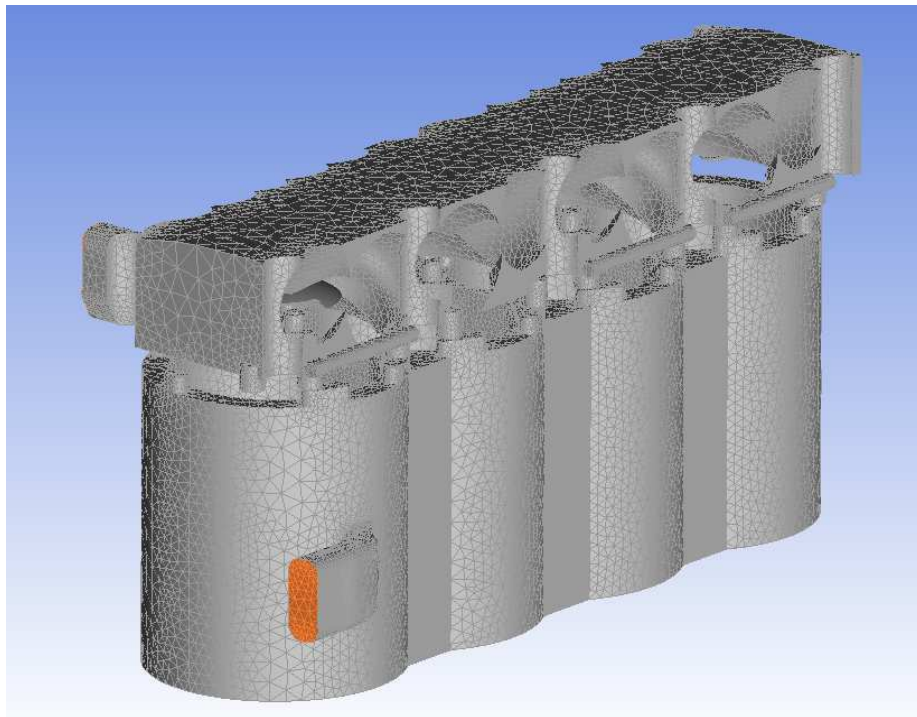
FLUENT MESH ON CAD SOLID OF HEAD and ENGINE BLOCK
